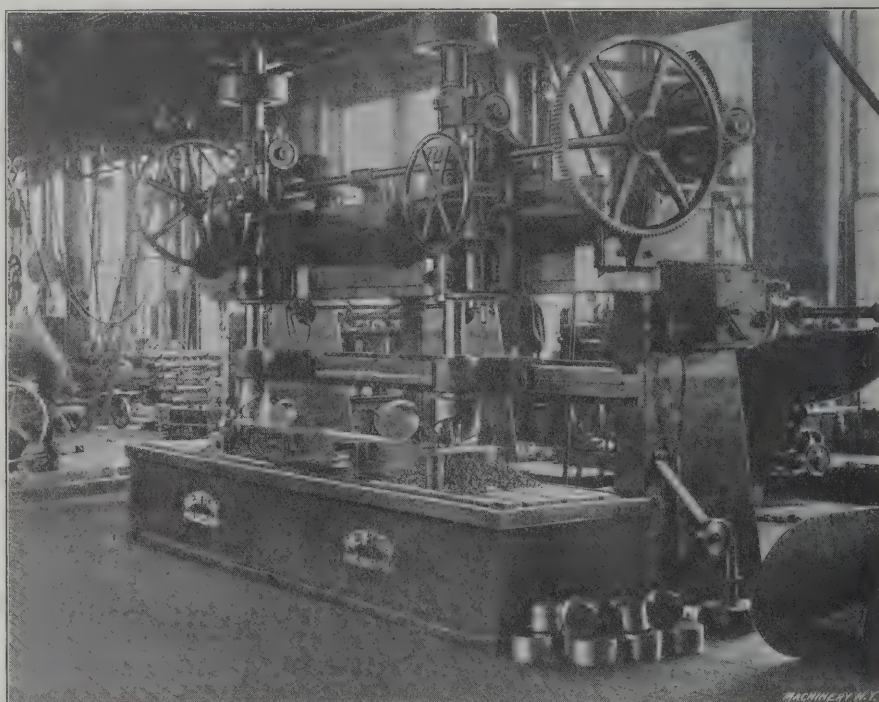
Cutting the Crank-pin and Knuckle-pin Holes in the End Rod in a Double-spindle Newton Boring Machine
